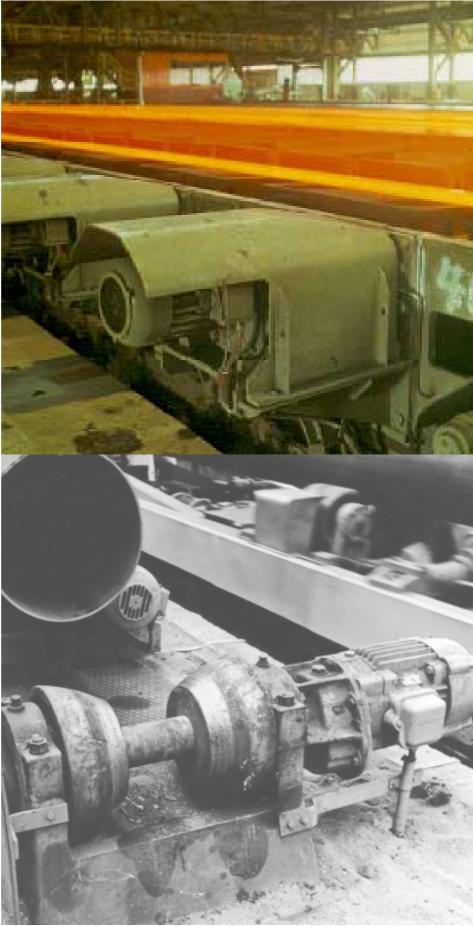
Roller table geared motors driving taper rollers for conveying pipe under heavy mechanical stress
